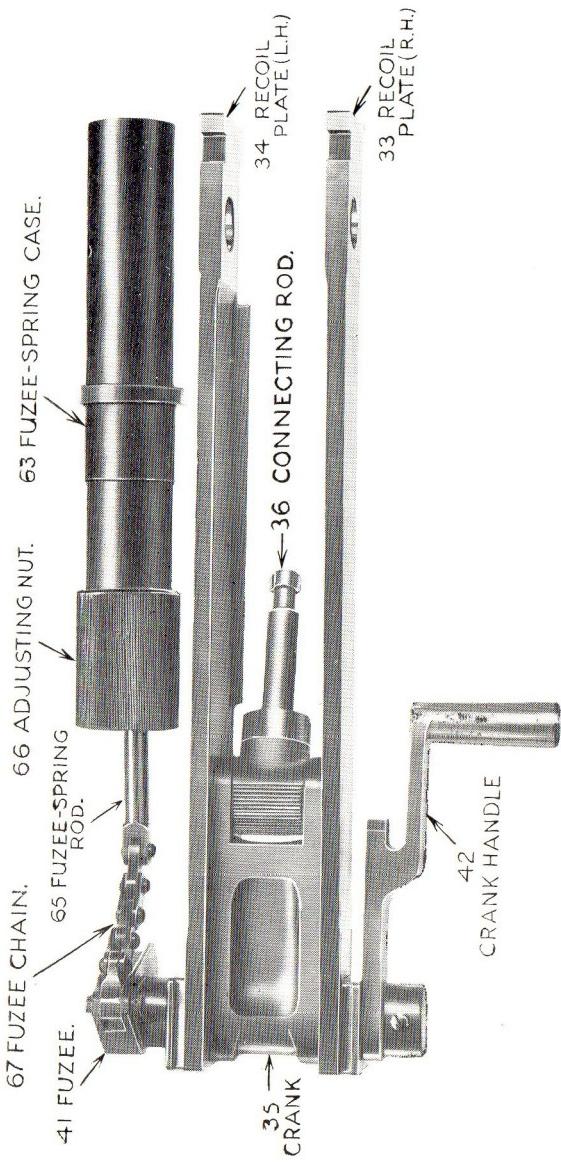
Assembly of Recoil Details with Spring Case and Adjusting Nut.
